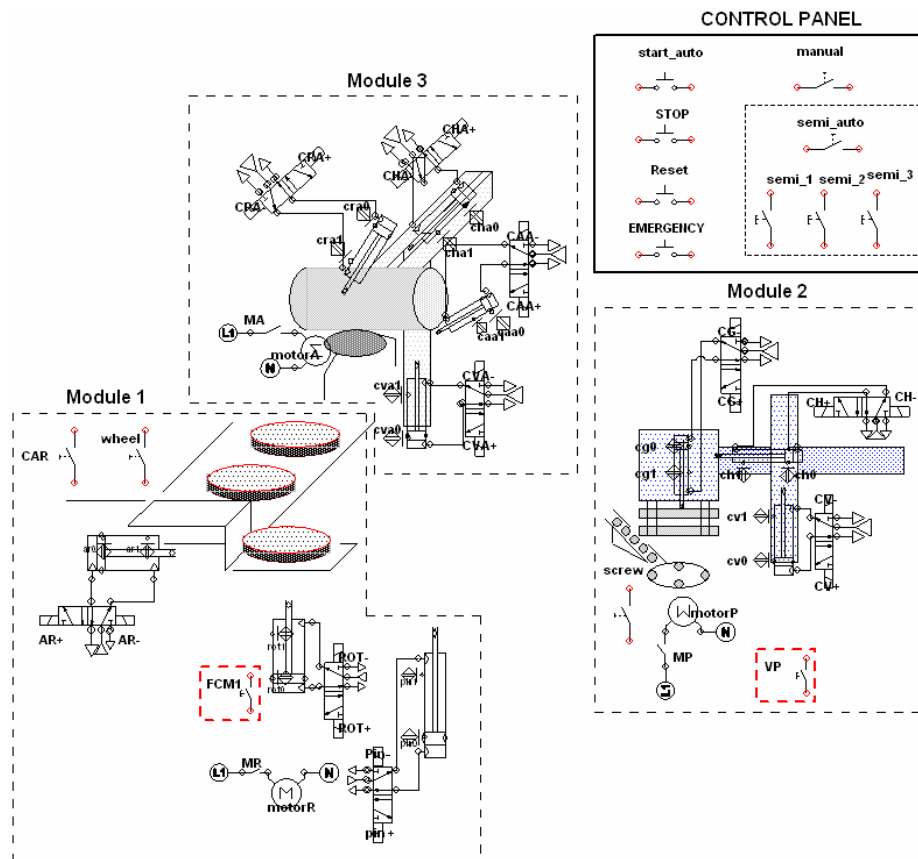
Plant of the machine for the automatic assembly of car wheels.
